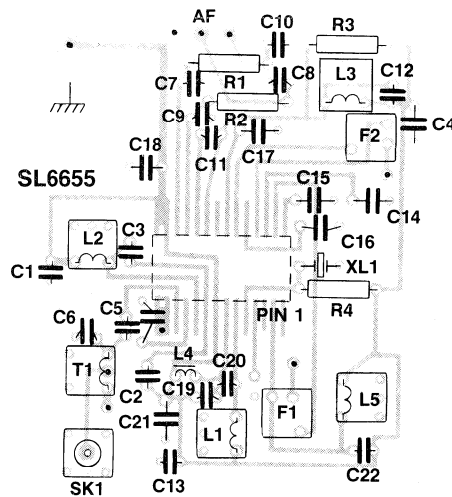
A component overlay (SL6655 in MP package surface mounted on track side of board)
